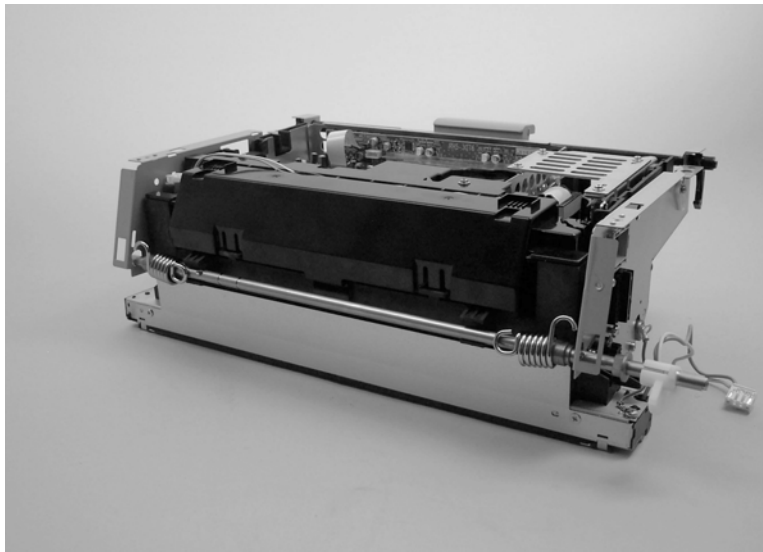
Reinstalling the ADF optic assembly (1 of 2)
